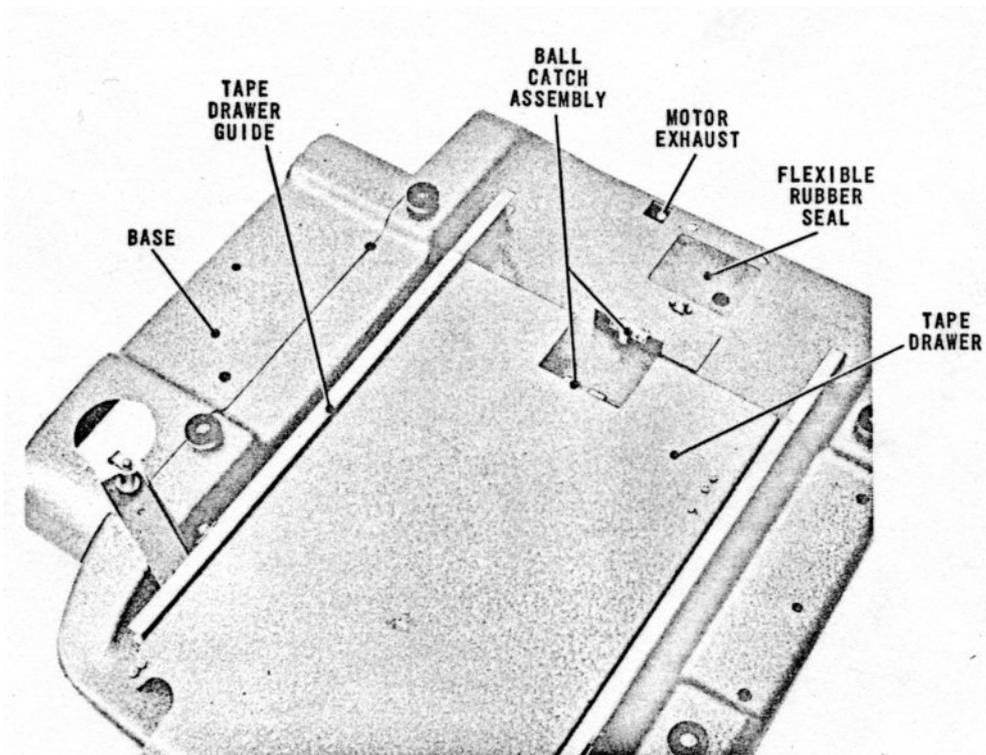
TAPE DRAWER AND BASE-UNDERSIDE VIEW
